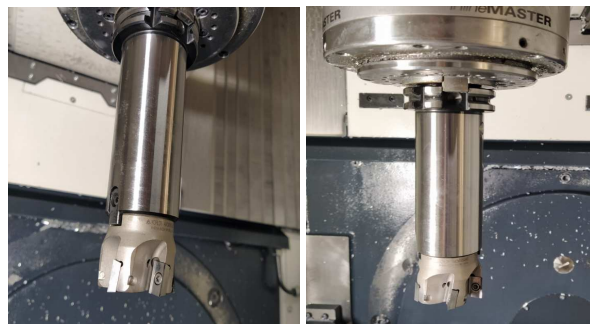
Face Milling Cutter with Ø50 mm Diameter
